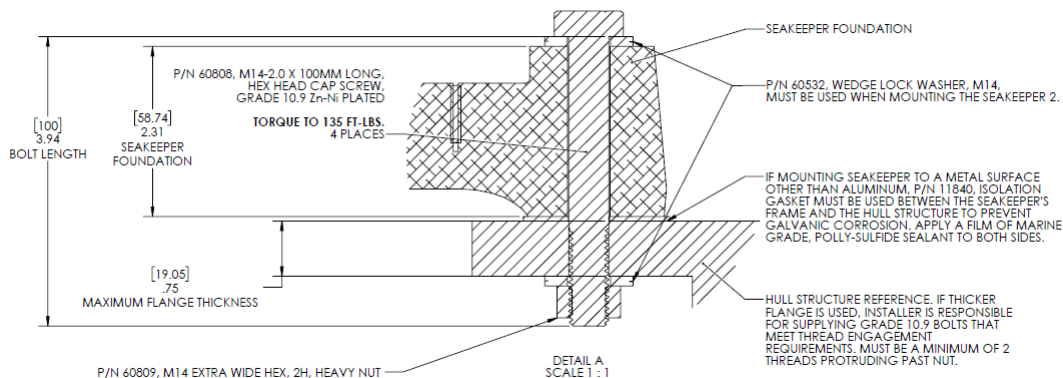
Seakeeper 2 Bolt-In Installation Details (PN 90487)
